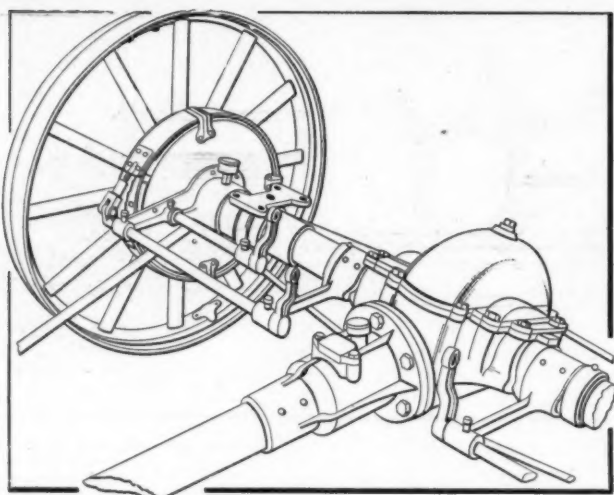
Details of the Marathon live rear axle showing the fastening of the torsion tube housing the propeller shaft
